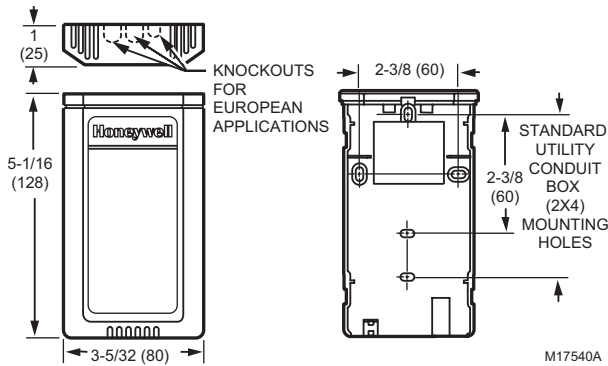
Wall-mount sensor dimensions in in. (mm).
